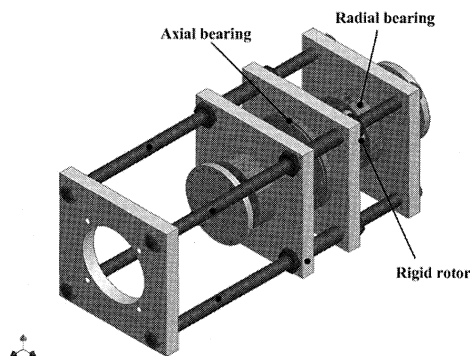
Lab stand for testing of rigid rotors with magnetic bearings
